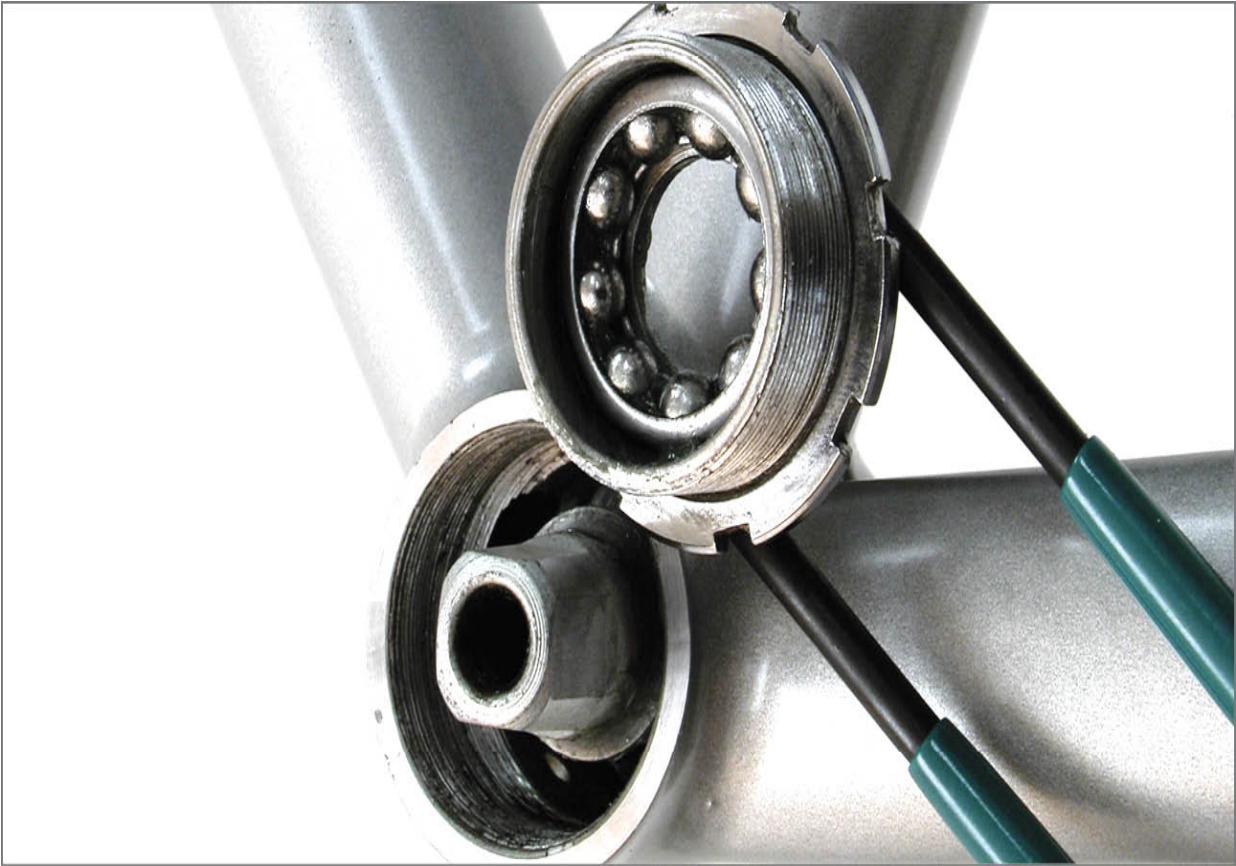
Remove adjustable cup (left-side) lockring, bearing cup and bearings
